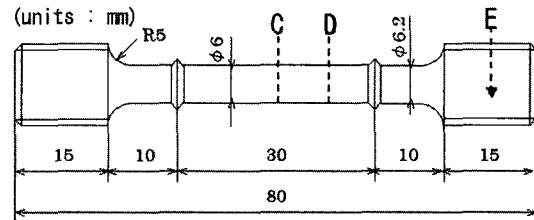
Dimension of the specimen. (C : Part of necking and fracture, D, E : points of hardness measurement and TEM observation)
